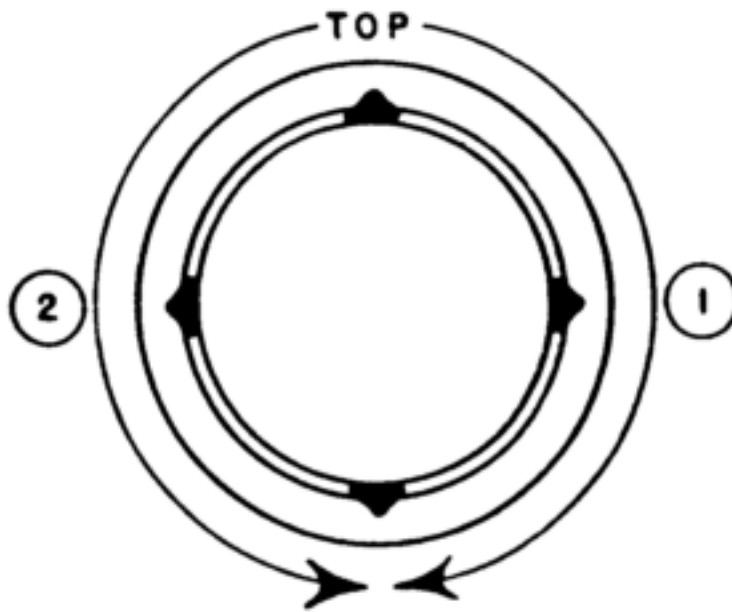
Diagram of horizontal pipe weld with downhand method.
